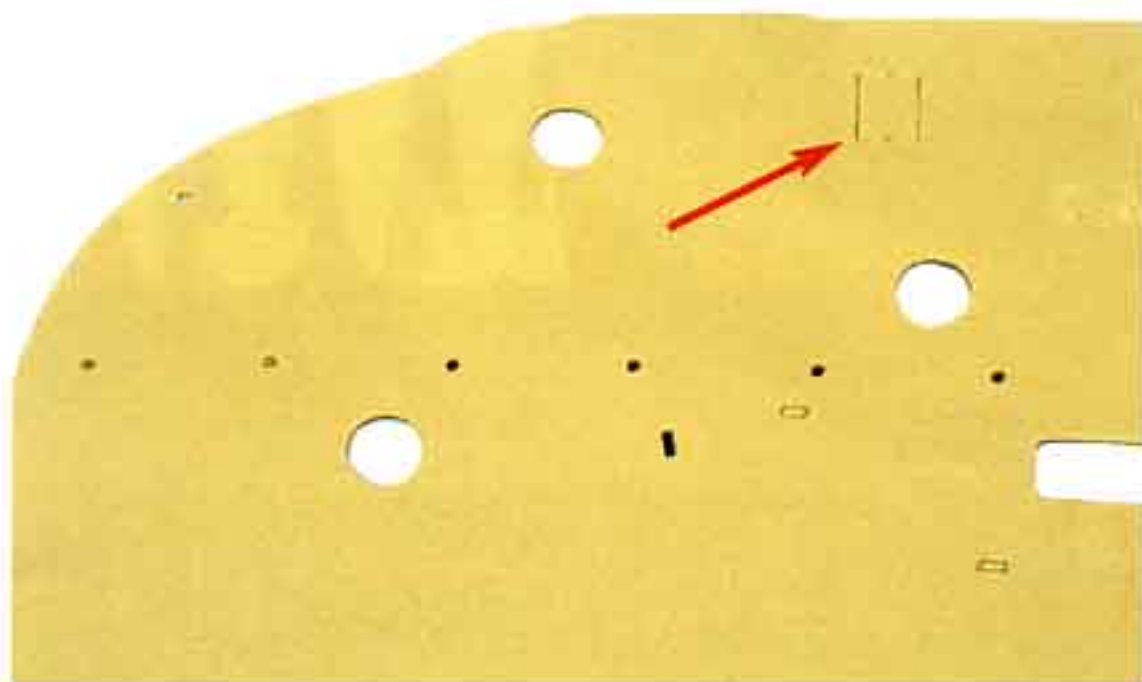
If you are installing new side panel upholstery and would like the door switches to be located in the original position near the top of the door, use the square punch-outs in the new door panels to locate the switches in the panels and the inner door. Cut the inner door sheetmetal to correspond with the holes in the cardboard panels.
